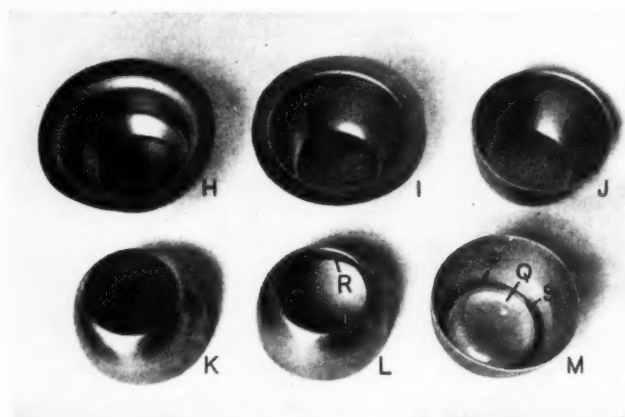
Successive Steps in Forming Front or Lens-carrying Part of Spot-light Lamp
